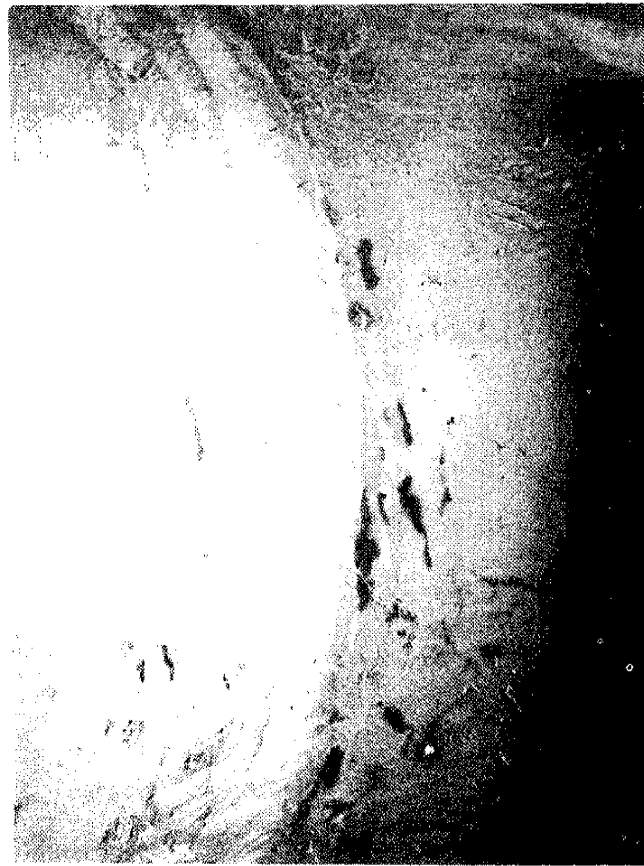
Severe hot fissuring adjacent to weld in HK-30 5-in. dia. by 3/4-in. wall stainless steel fitting.
